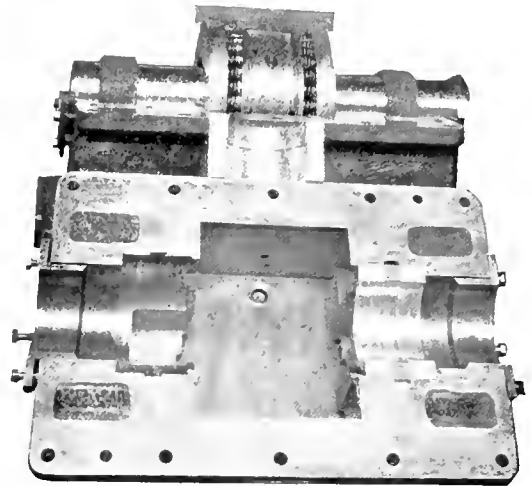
Upper Housing Removed from Spring Thrust Bearing
